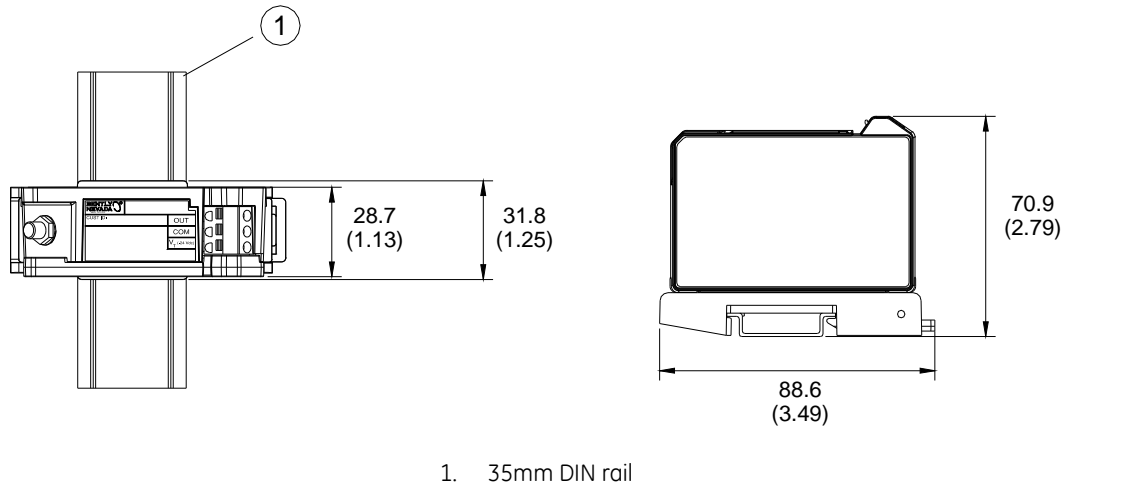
DIN Rail Mount Dimension in Millimetres (Inches)
